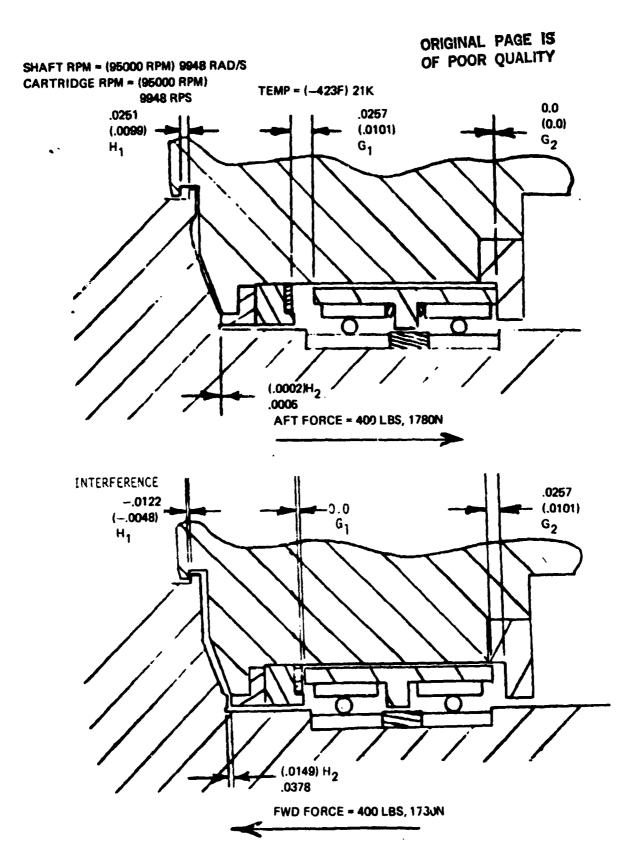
Turbine End Cartridge - Balance Piston System Axial Position Limits
